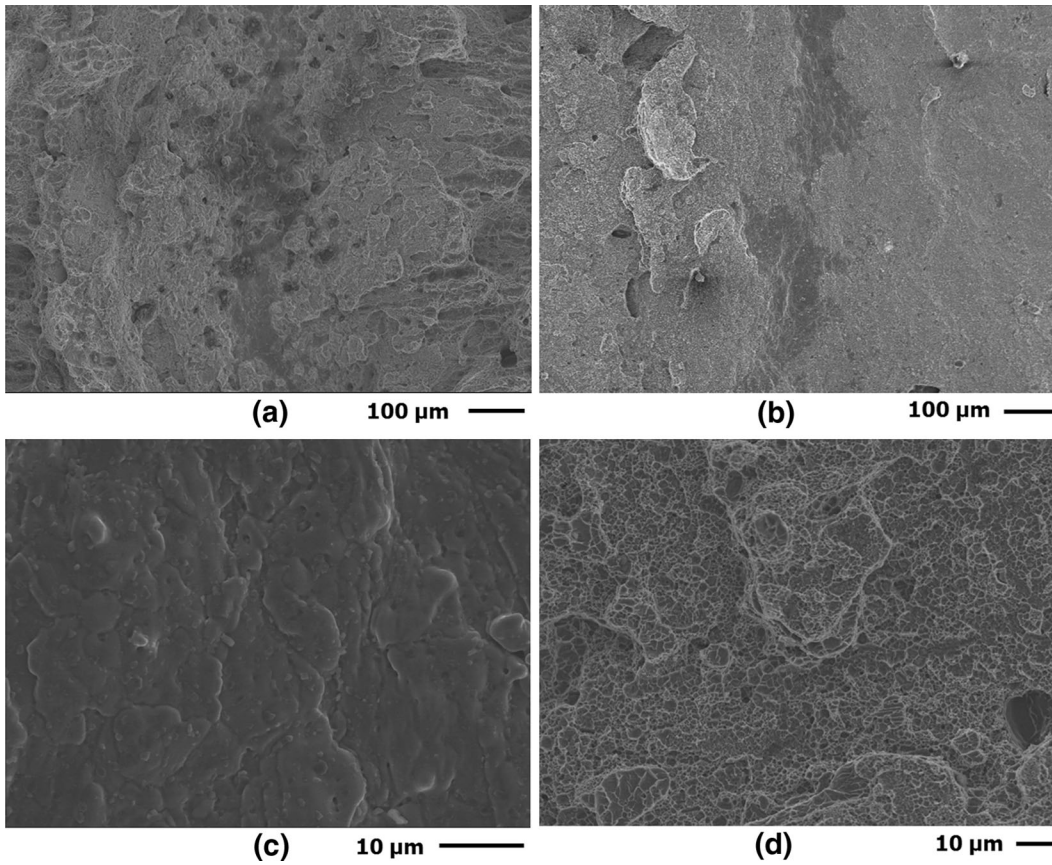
(a) 30 pct rolled 1-mm pore sample surface after a tensile test, (b) 30 pct rolled 2-mm pore sample surface after a tensile test, (c) unwelded region in 30 pct rolled 2-mm pore sample, and (d) perfectly welded region in 30 pct rolled 2-mm pore sample.
